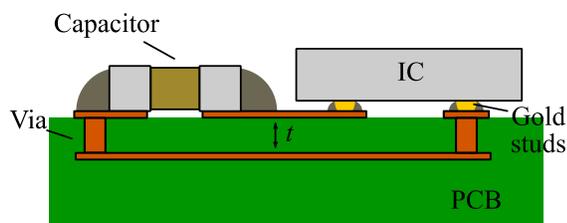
Drawing of low-inductance PCB assembly of the IC with flying capacitors.
